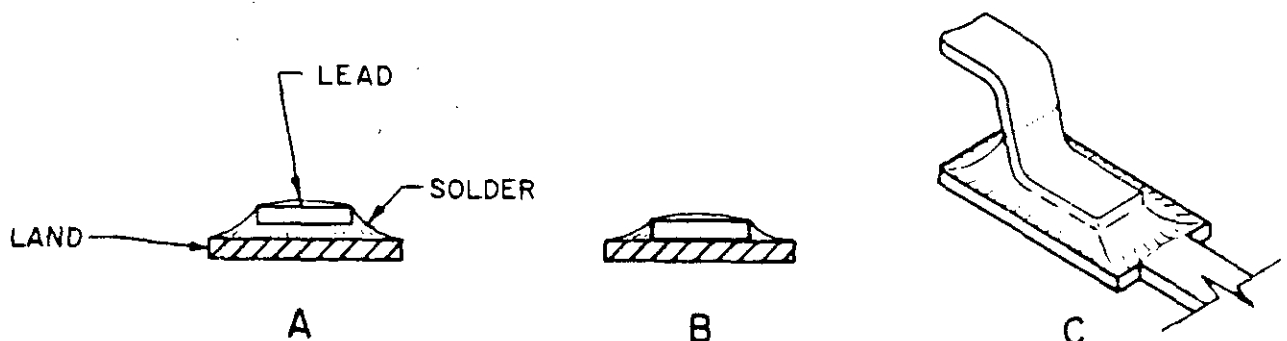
Planar mounted device flat lead solder fillet (5.7.11).
